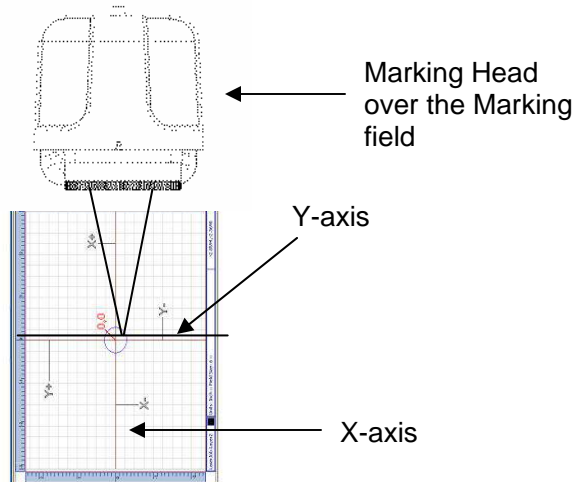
6 inch Marking Field with a Marking Head Assembly
